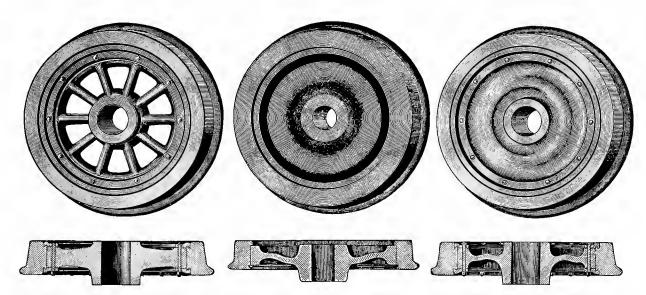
No. 3 Krupp Wheel. Cast Fig. 1151—No. 14 Krupp Wheel. Iron Spoke Center with Tire Forged Steel Disc Center with Secured by Wrought Iron Retaining Rings.
